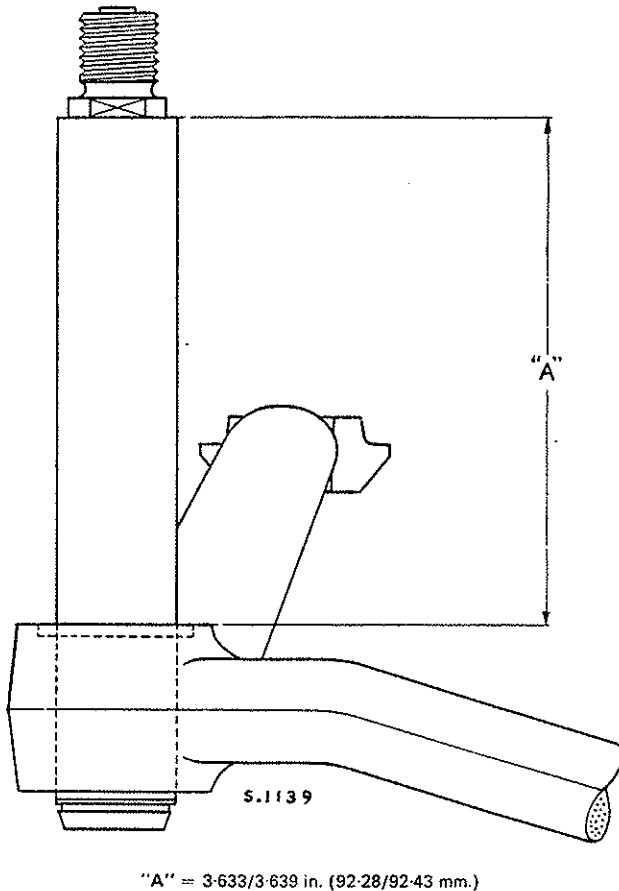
Relay lever and fulcrum pin pressing dimension
